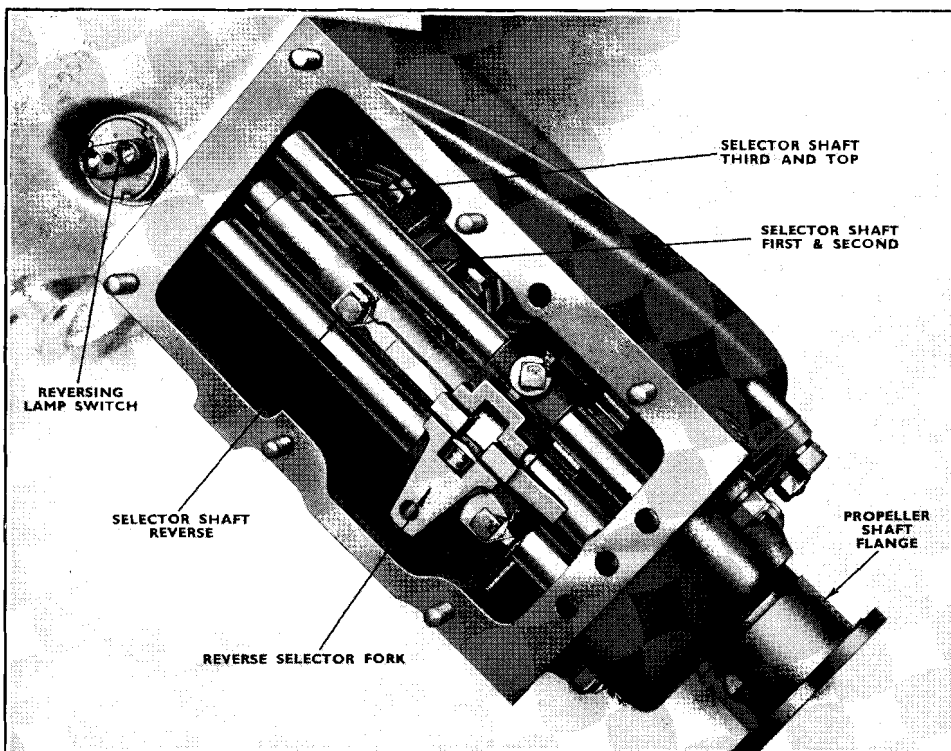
Illustration No. 33.—View of selector gear used when “one-piece” remote control is fitted.
